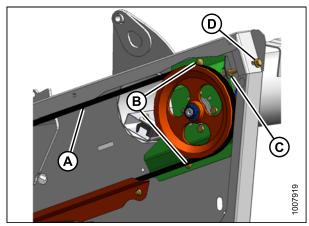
Left-Hand Shown - Right-Hand Opposite for Double Knife
